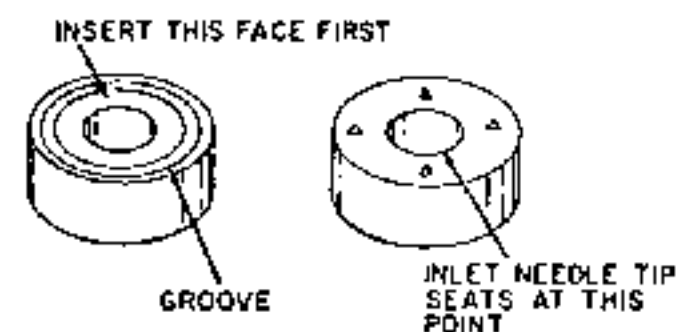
The Viton seat used on some Tecumseh carburetors must be installed correctly to operate properly. All metal needle is used with seat shown.
